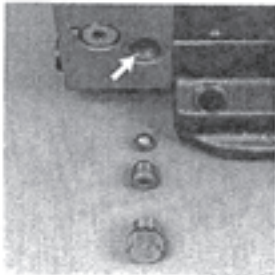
Remove Servo Pressure Ball Shuttle Valve
